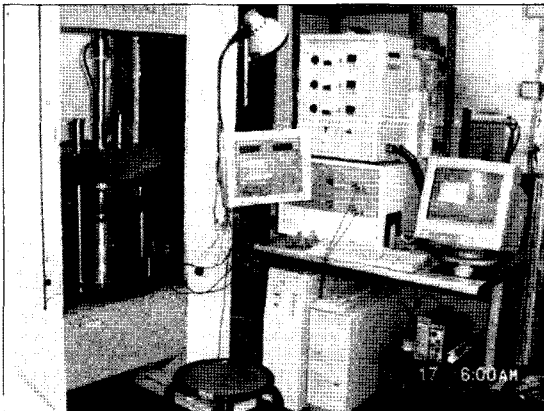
The equipment for warm deep drawing with local heating and cooling system
